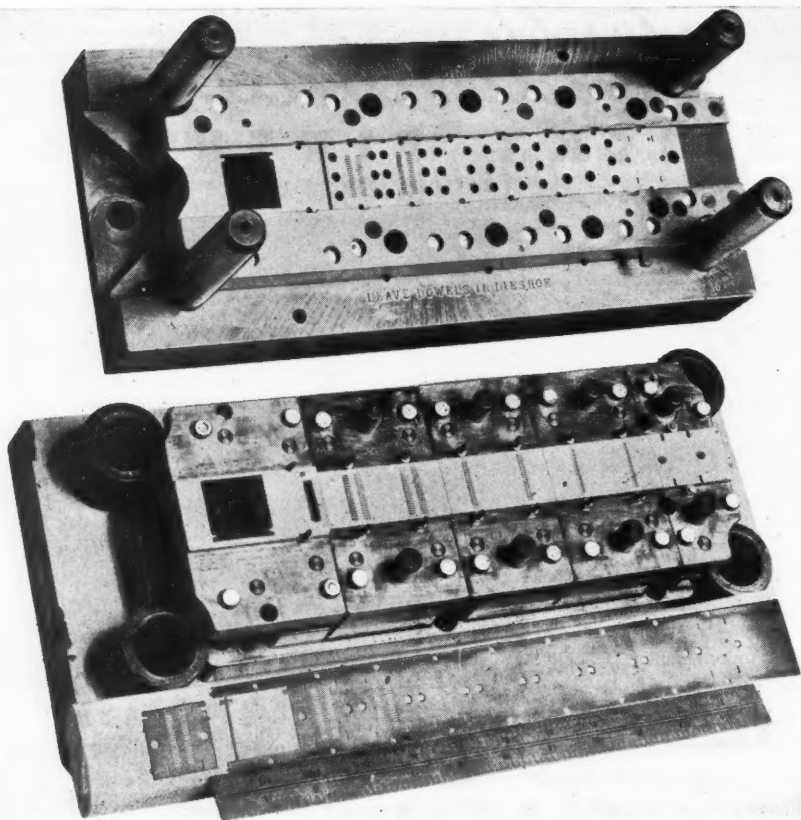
This illustration shows, at top, a four-post progressive die built in five sections; at bottom, the face of the punch holder in which the punches are surrounded by five stripper plates. This die produces dry shaver heads. The scrap strip and blank are shown in the foreground.
